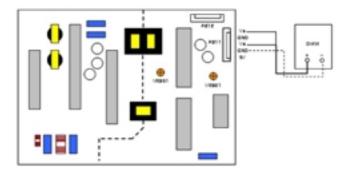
50inch Power PCB Assy Voltage Adjustment
